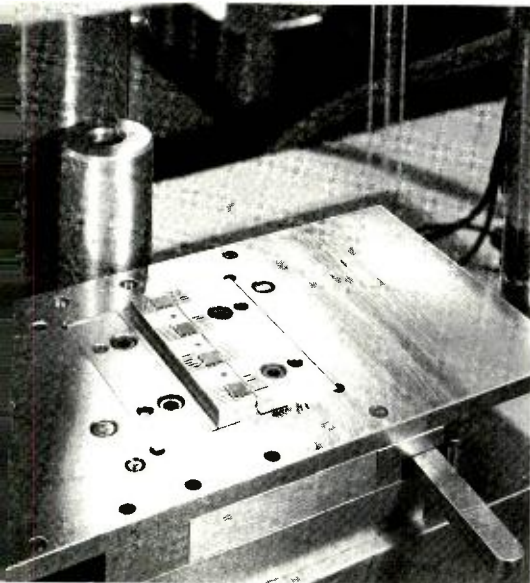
ICPs as they would appear just before inserted into a printed circuit board.
